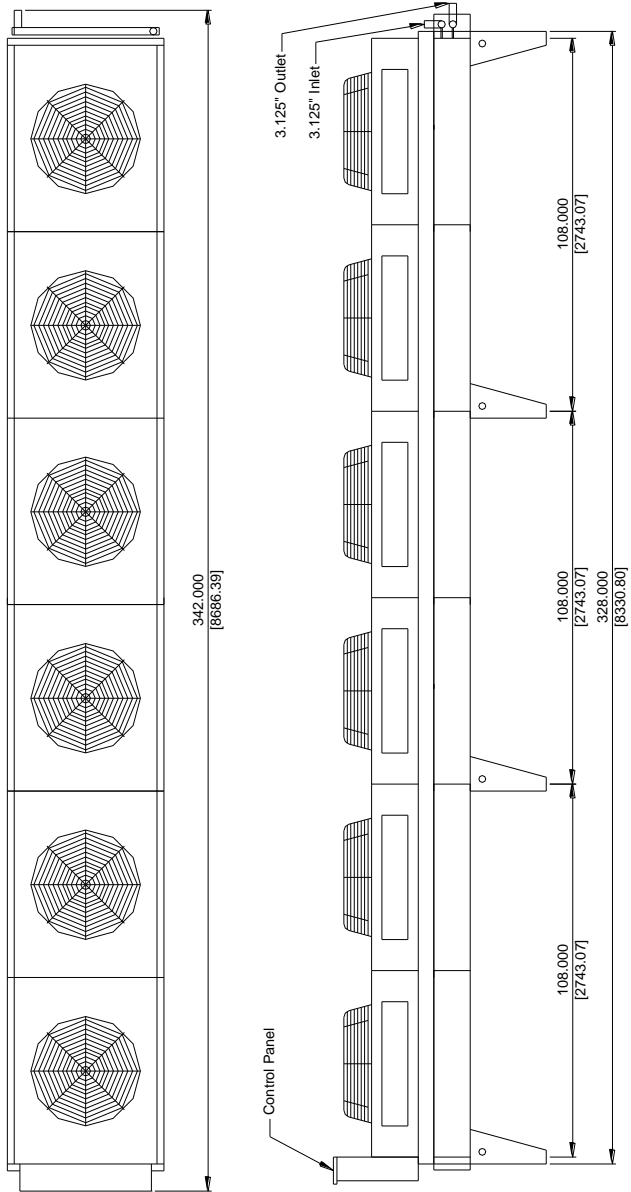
MXR75 Remote Condenser Model LAVF16410 Weight & Dimensions Drawing
